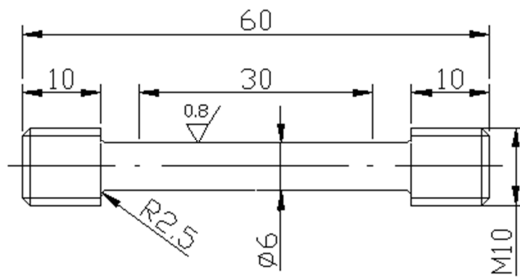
Shape and size of cylindrical tensile specimen (unit: mm).
